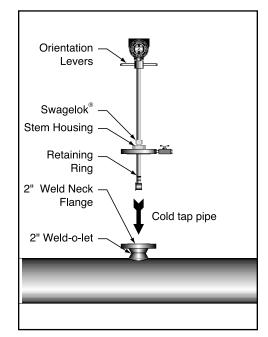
Installation for V-Bar-700 with Flanged Connection
